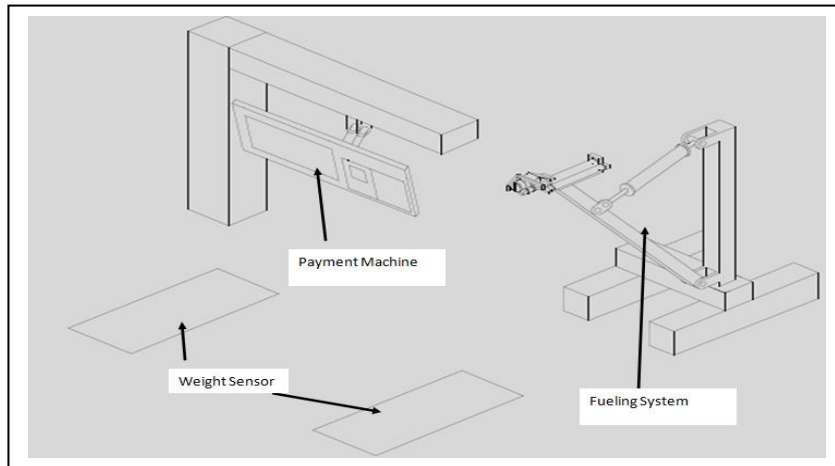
Three Dimensional (3D) Isometric View for Complete Automatic Vehicle Fueling System
